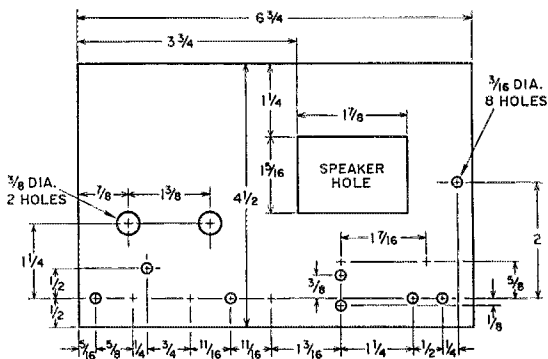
Chassis layout for the 50-Mc. transistor receiver. Not all holes are shown, as some components will vary in size, depending on the manufacturer.
